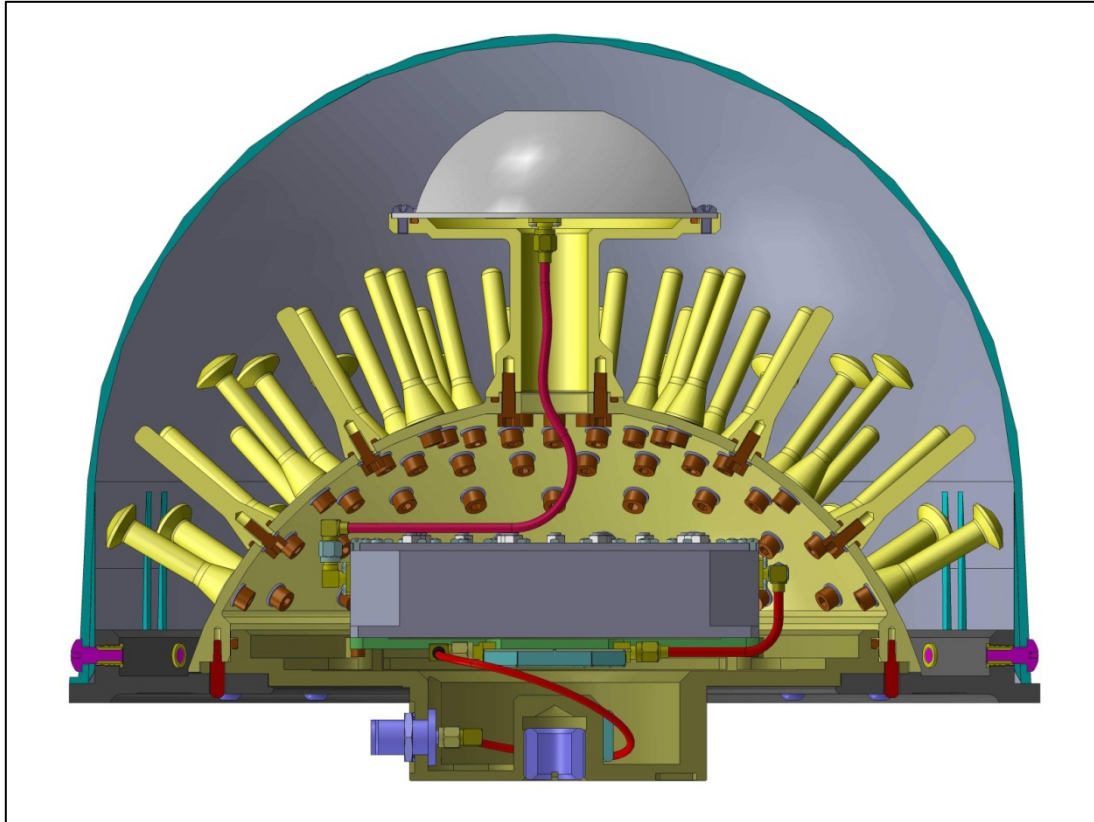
Mechanical assembly of PN-A5-C antenna
